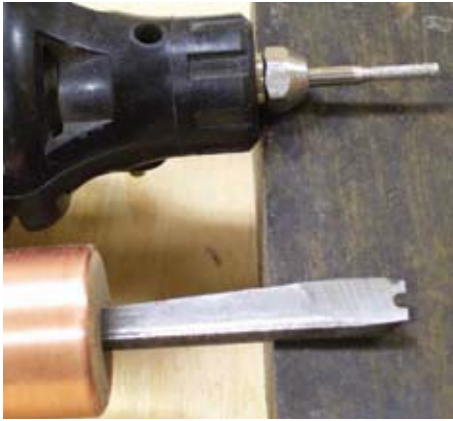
The finished beading tool along with the Dremel used to shape the beading section.
